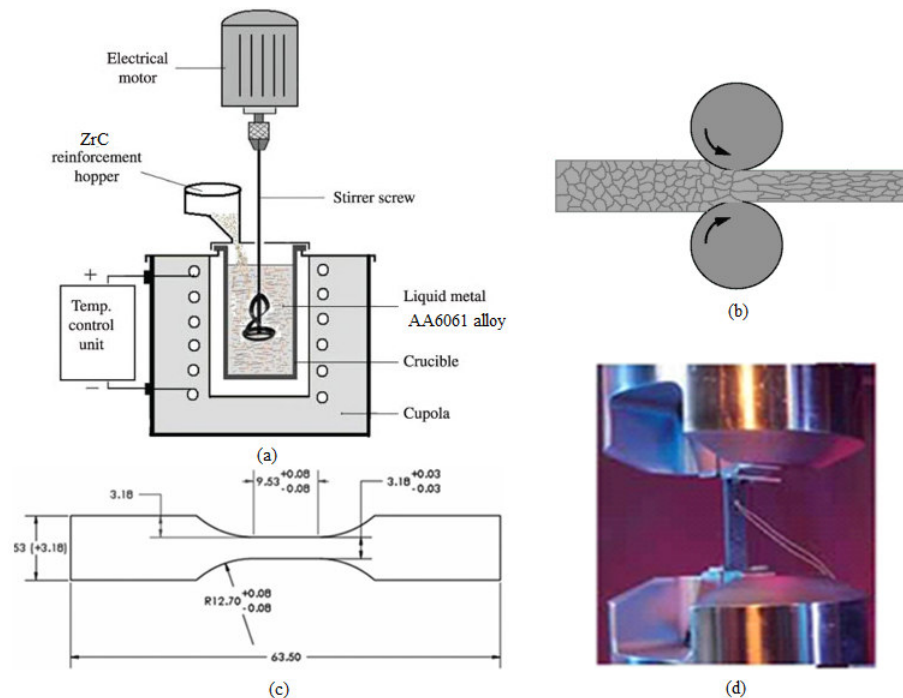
Stir casting process; cold rolling (b); shape and dimensions of tensile specimen (c); and tensile testing on UTM (d).
